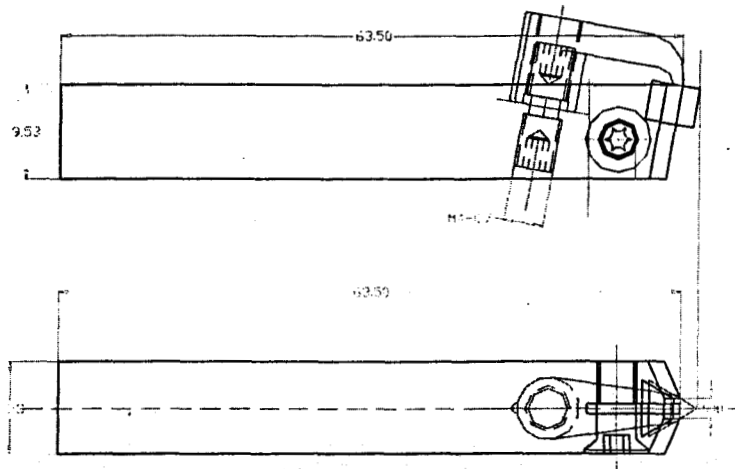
The drawing of diamond cutting tool with triangle cutter and steel holder
